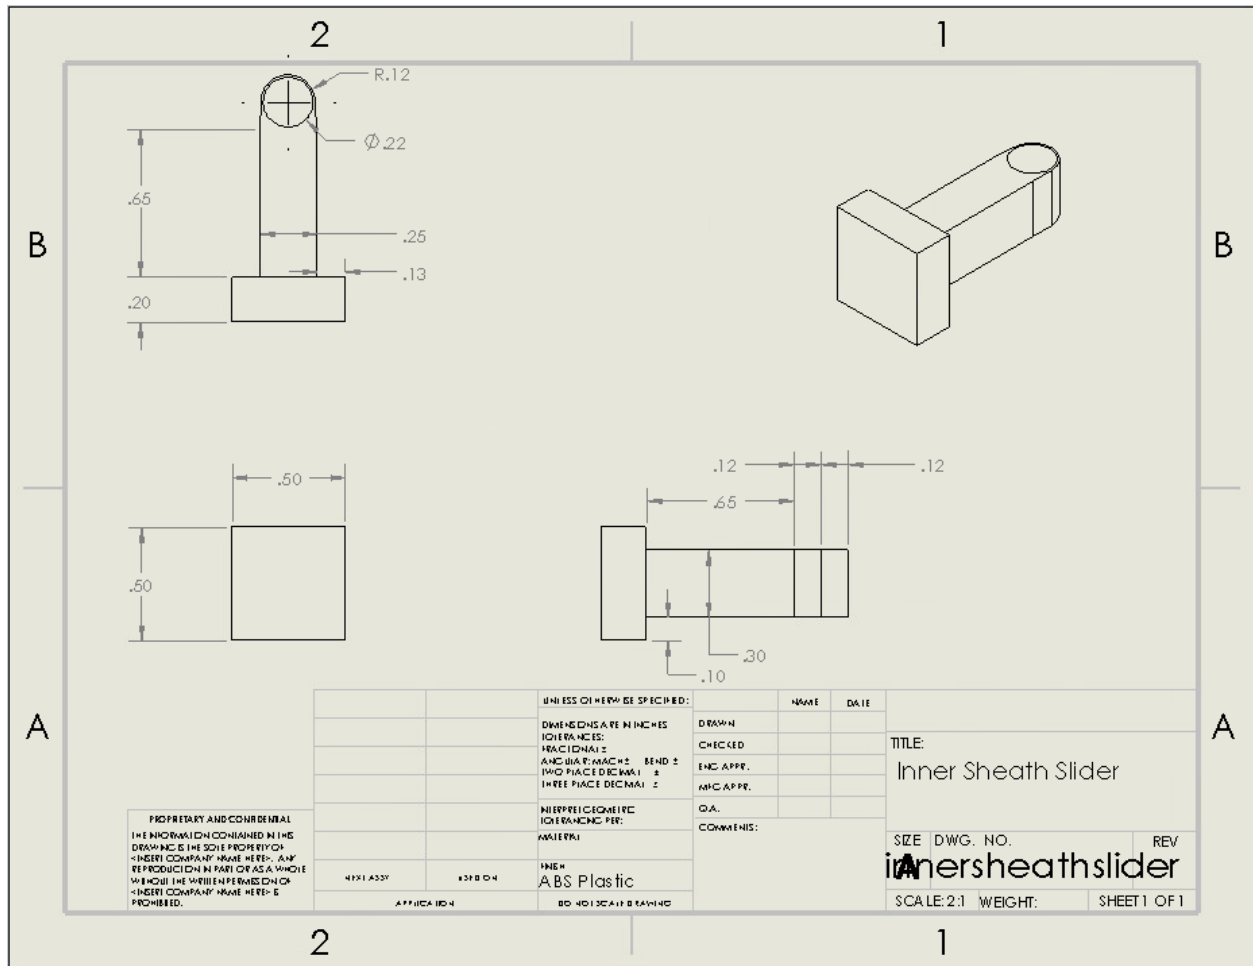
Solidworks Drawing for the Inner Sheath Slider.
